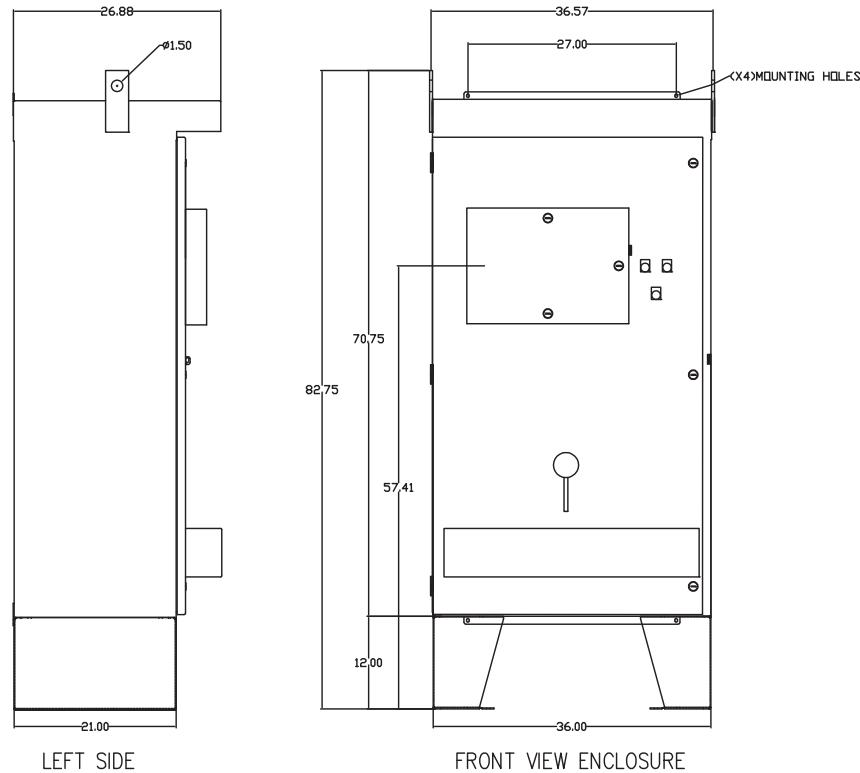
Frame 3 with Optional Floor Mount Kit Installed
